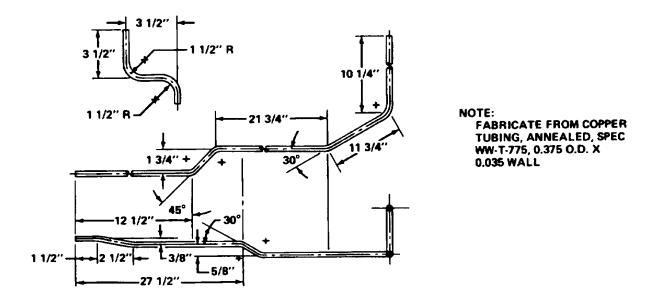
Tube, Air Filter Tee to Union; Right Front.
